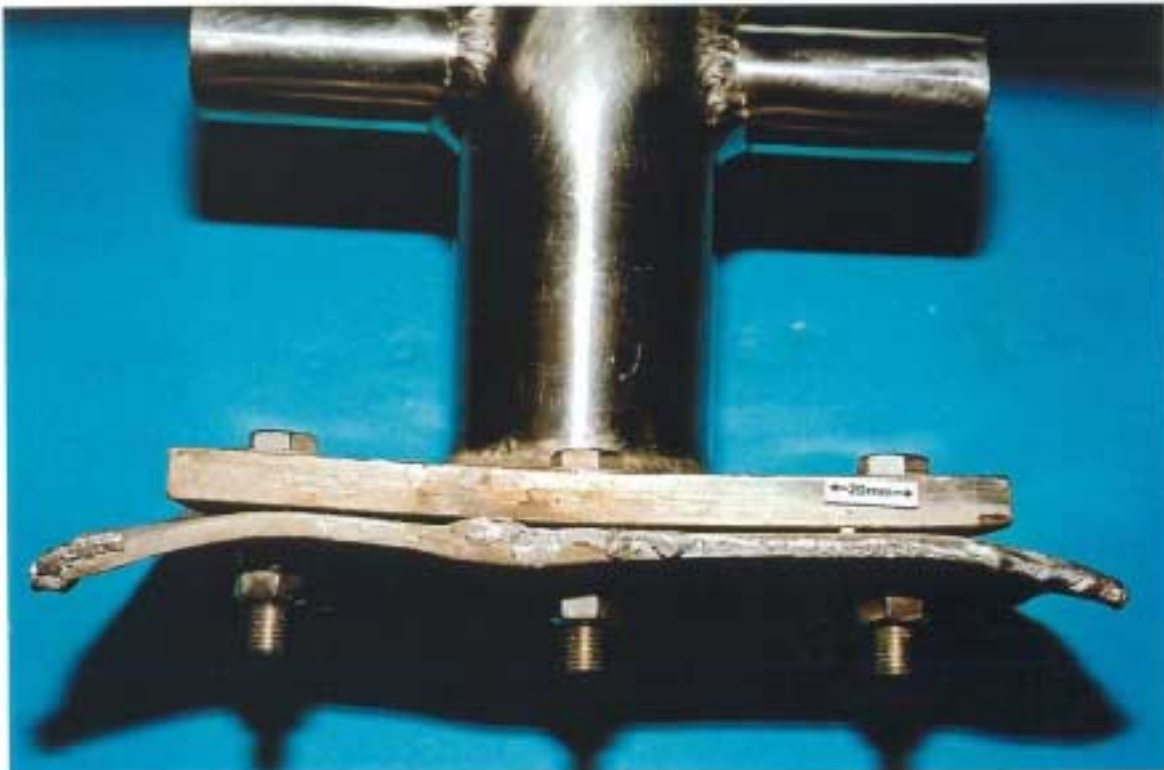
Detail of above, showing fracture in weld metal that was present at the forward end only.
